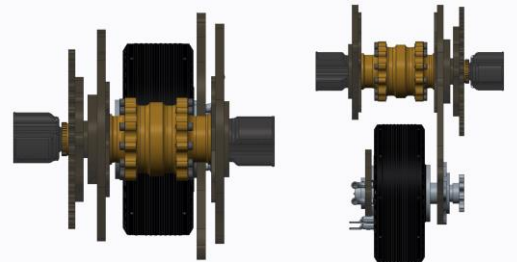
, 61 LSD & Motor Assembly Back / Top View
